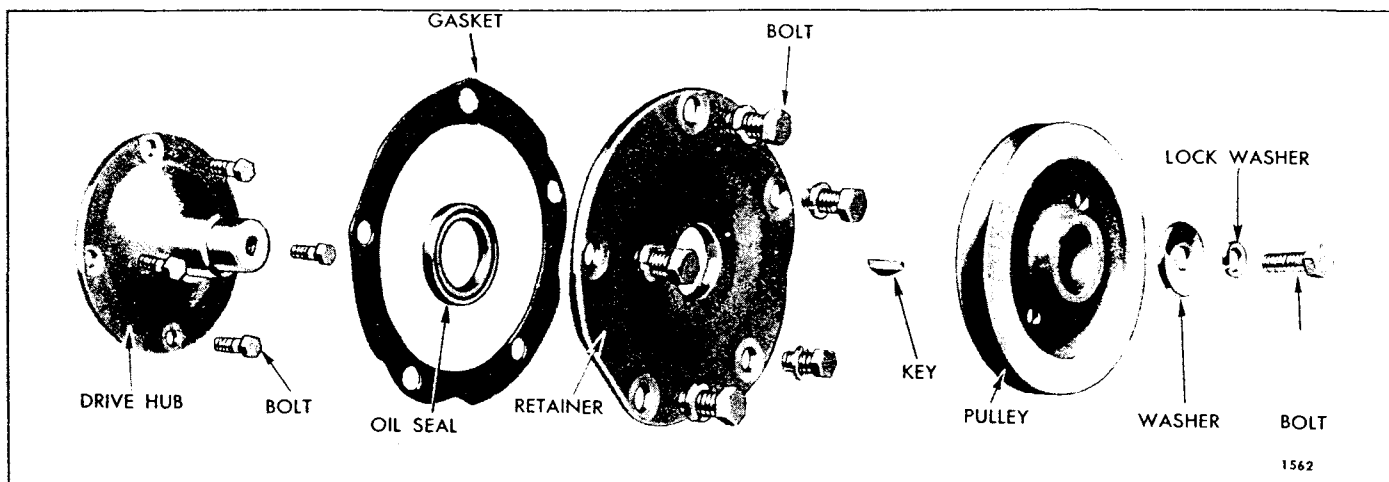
Components of Accessory Drive for Belt-Driven Accessory (Drive Hub Type)
